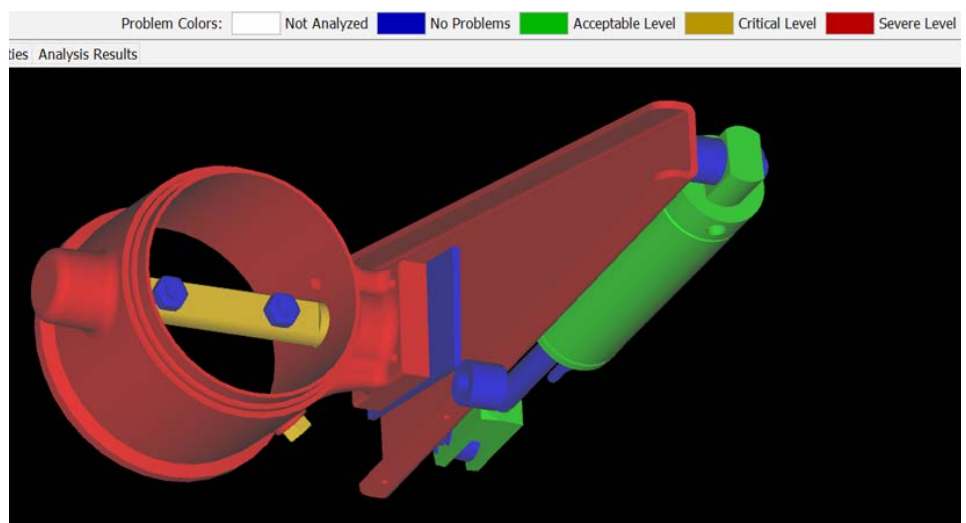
Engine Break Butterfly Shaft Seized Inside Iron Pillow Block [2].
